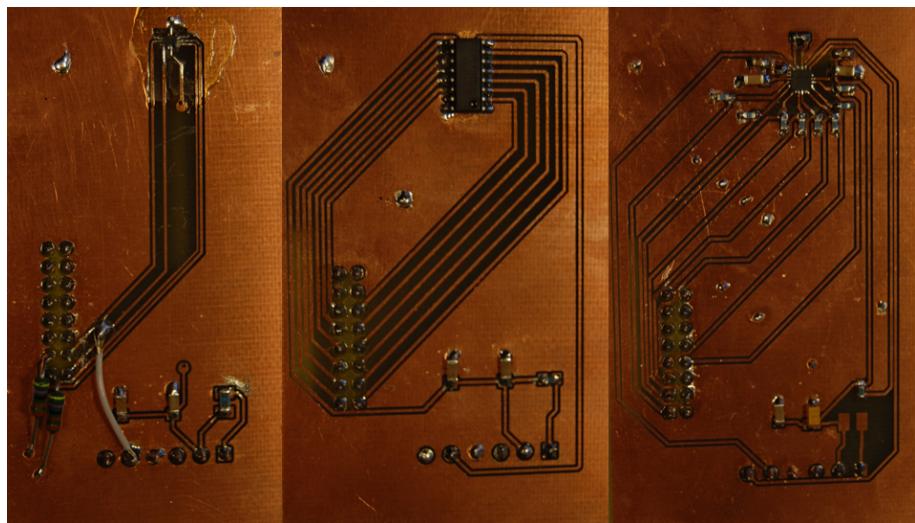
Picture of PCB boards, from left we have, SN74AVC2T245, QS3VH257 and SY89831U
